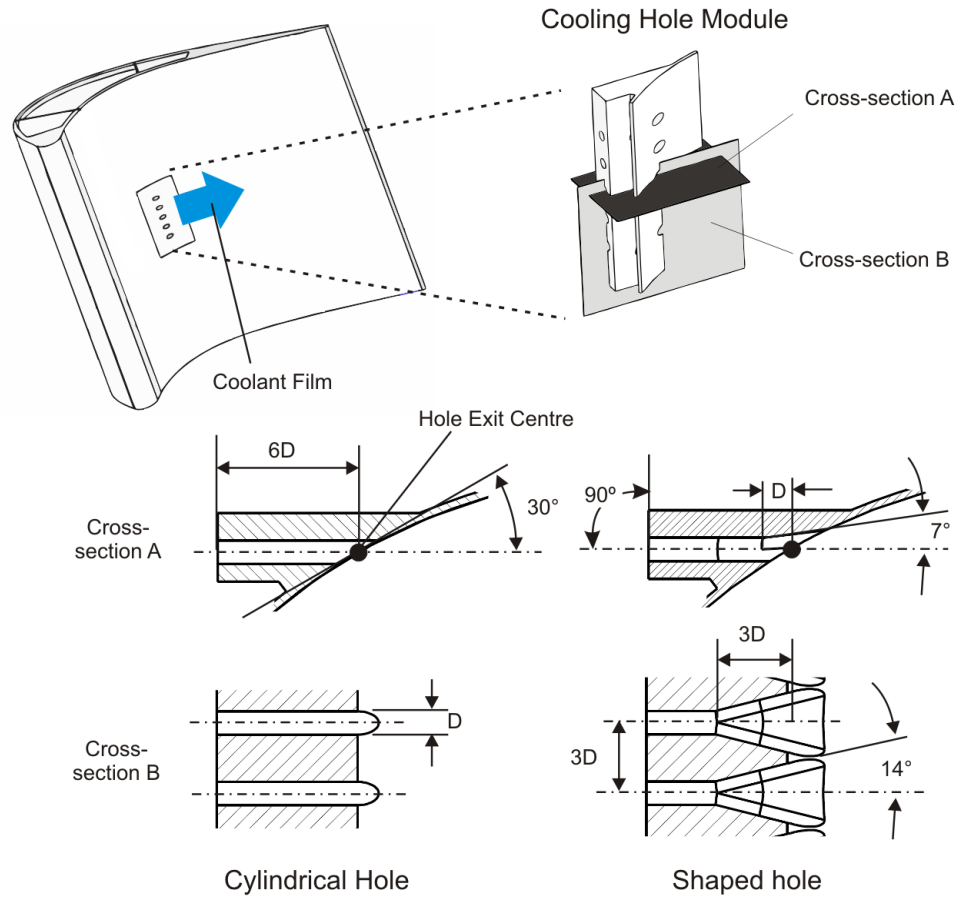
The cooling hole geometries, (upper) the removable module, (lower-left) cylindrical hole dimensions and (lower-right) shaped hole dimensions.
